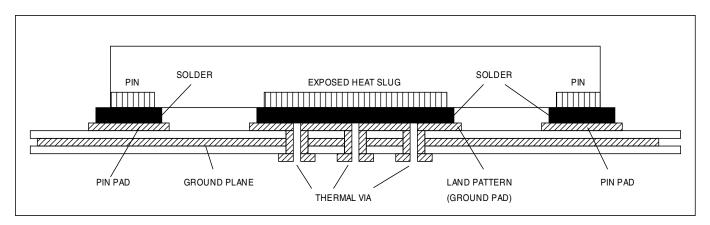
P.C.ASSEMBLY FOR EXPOSED PAD THERMAL RELEASE PATH -SIDE VIEW (DRAWING NOT TO SCALE)
